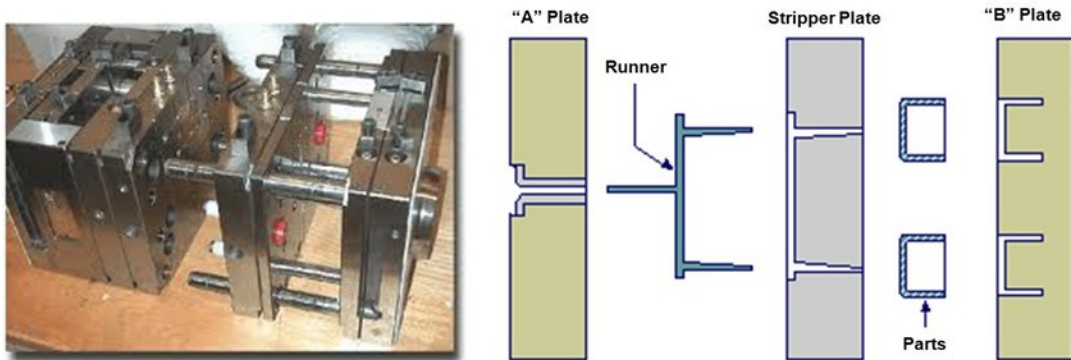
Three-Plate Mold Assembly [8]-[9]
